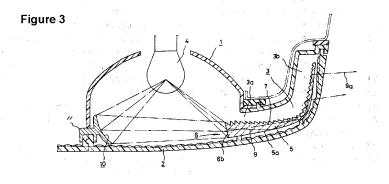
to Figure 3 are partial cross-sectional views showing a conventional vehicle light fixture. Figure 4 to Figure 6 are partial cross-sectional views showing embodiments of the vehicle light fixture pursuant to the present device.
